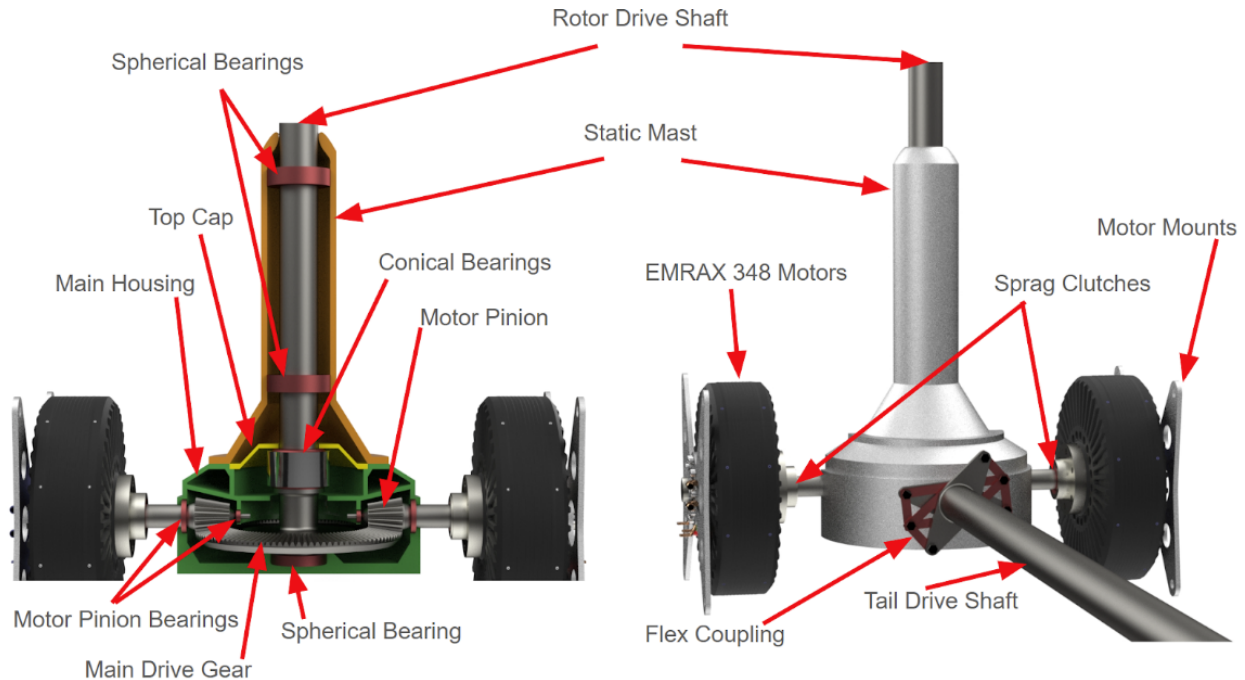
Main Transmission Layout, Front View (left) and Back View (right)
